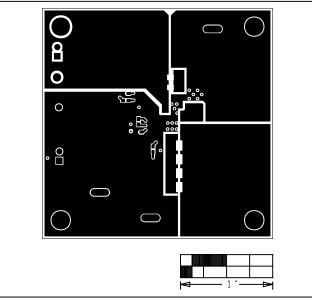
MAXM17503 EV Kit PCB Layout—Solder Side
